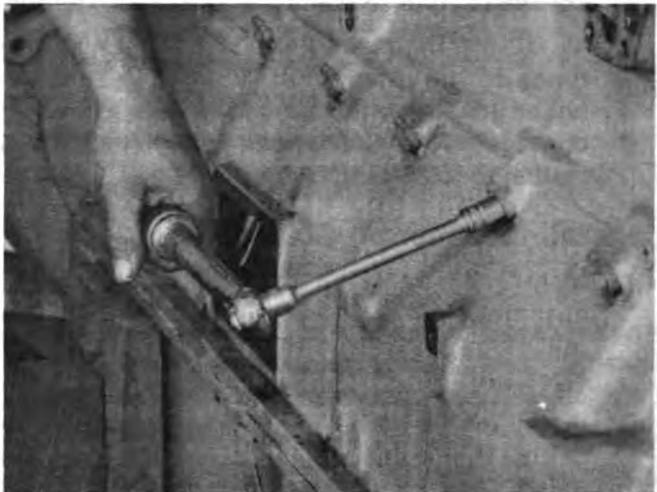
Tighten The Screw For The Piston Cooling Nozzle.
